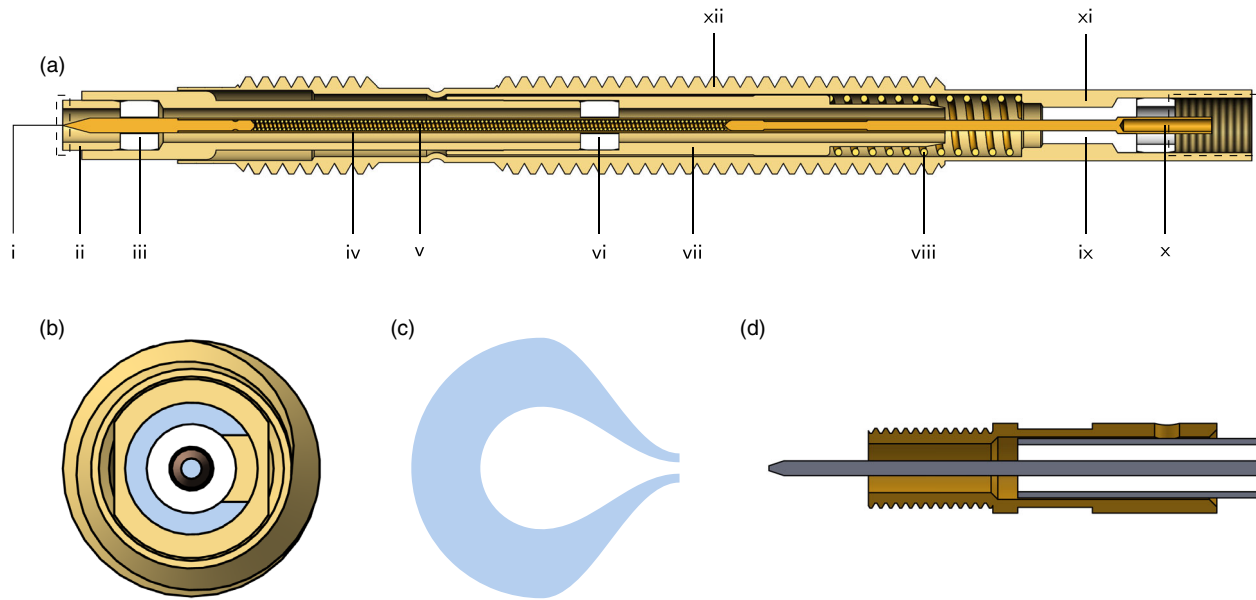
Two-dimensional cut view of the three-dimensional wire, contact pad, and screw-in microconnector. (a) Side view of the wire cross section. The wire components are i spring-loaded center conductor of the contact head; ii spring-loaded outer conductor of the contact head; iii, vi, and ix dielectric spacers; iv center-conductor barrel; v center-conductor spring; vii outer-conductor barrel; viii outer-conductor spring; x center-conductor tail; xi outer-conductor tail; and xii threaded outer body. The dashed box on the left indicates the contact head, whereas that on the right indicates the female threads included for use with the screw-in microconnector. (b) Front view of the wire. The blue surface indicates the wire bottom interface. (c) On-chip contact pad. Here, the blue surface indicates the pad dielectric gap, whereas the white surfaces refer to conductors (thin metallic films deposited on a dielectric substrate). (d) Screw-in microconnector. The left end of the microconnector mates with the back end of the three-dimensional wire; the right end is soldered to a coaxial cable, the inner conductor of which serves as the inner conductor of the microconnector (slotting into x).
